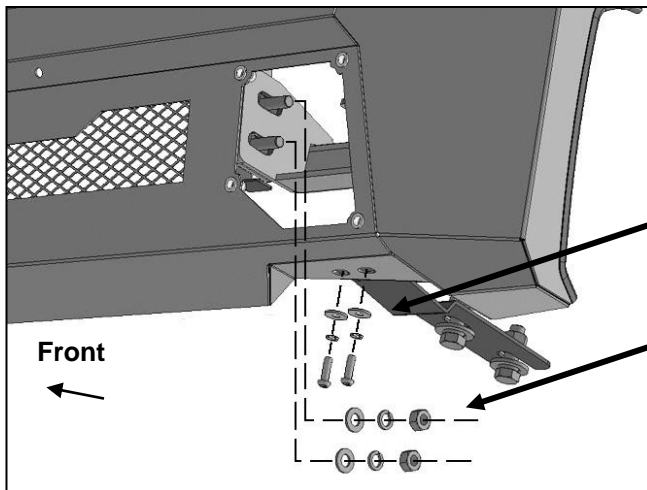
Attach Support Bracket to top of Bracket Assembly and factory tow hook (if equipped)
